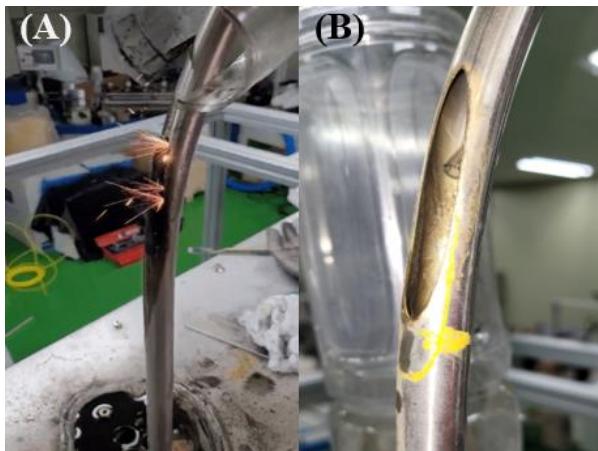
EDM test for SG tube (A) Debris scattering (B) Window in bending zone
